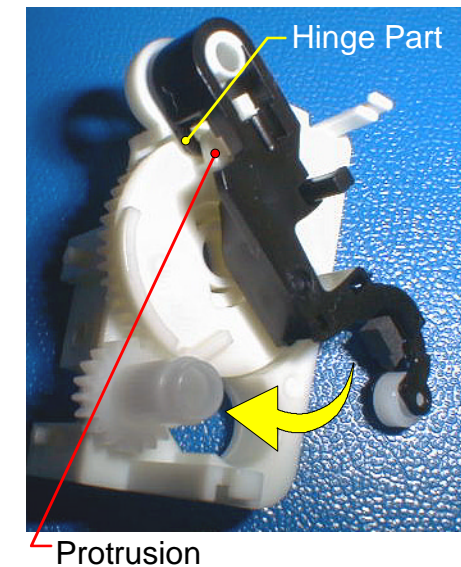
Setting "Lever Assembly, Curl(2)"
